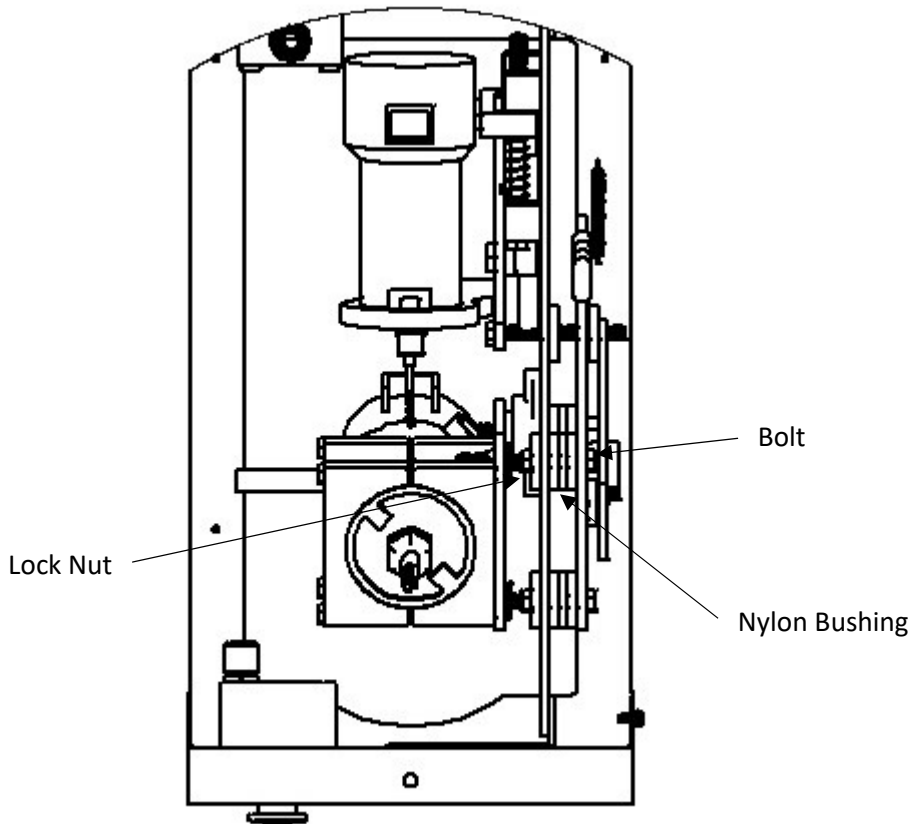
Guide Arm Adjustment (Top view with cover removed)
